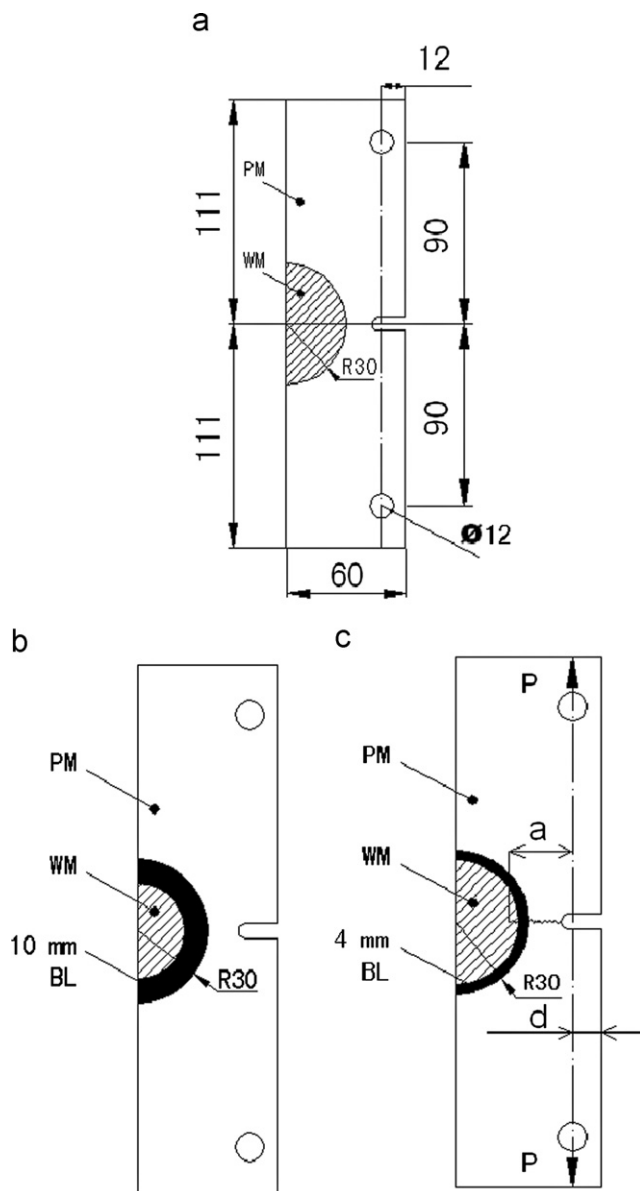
Dimensions of the E-CT samples (all dimensions are in mm). (a) Weld-repaired HSLA without BL, (b) weld-repaired HSLA with a 10 mm BL and (c) Weld-repaired HSLA with a 4 mm BL.
